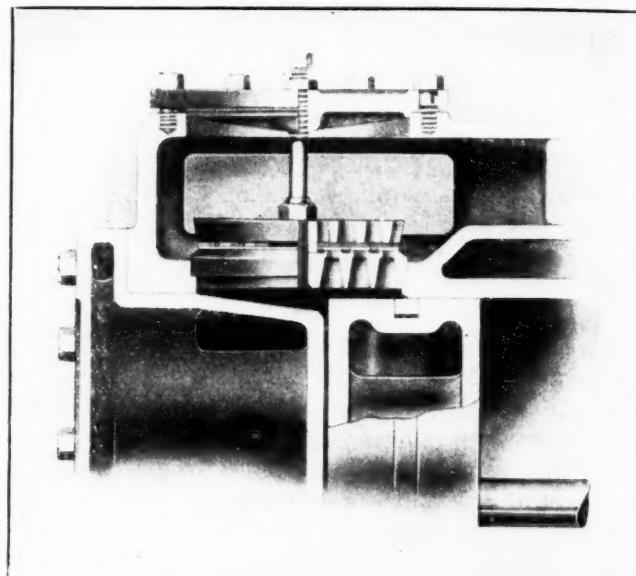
POSITION OF VALVES IN AIR CYLINDER
